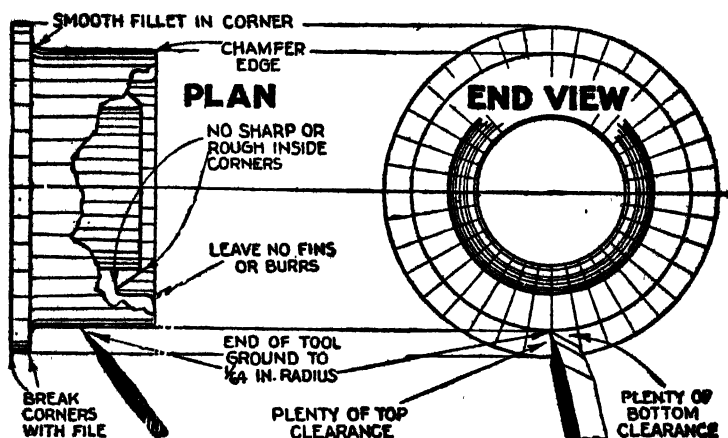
Correct setting and shape for commutator turning tool. All commutator surfaces must be smooth. If the tool be ground to a long radius point so common in turning steel and with a flat top clearance so proper for brass work, the speed of production on the job will run down about 5 to 1, a job that should take ten minutes with a properly ground tool, will take an hour and even $1\frac{1}{2}$ hours, the speed of turning will be much slower, and the chattering will be very severe, necessitating the use of a steady rest on many armatures that otherwise would not require it. Whereas if the tool be ground as here shown with the two bevels on the side very sharp say about 30° , with plenty of bottom clearance, and lots of top clearance, in fact the cutting edge should almost rise into a hook, and the radius of the point not to exceed $\frac{1}{16}$ " set at an angle of about 30° pointing forward in the direction of feed, the commutator can be run at high speed, and only in severe cases will a steady rest be necessary, the job will be smooth, free from burrs, will require little or no sand paper, it will only require running a few hours before the commutator sing is nearly eliminated, it will not start off with high mica. With improperly ground cutting tool, short circuits are quite prevalent.
